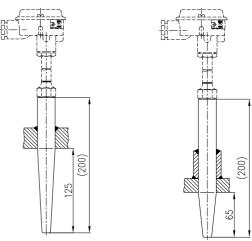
EXAMPLES WELDING OF THERMOWELLS AND WELD-ON PIECES PURSUANT TO DIN 43772
